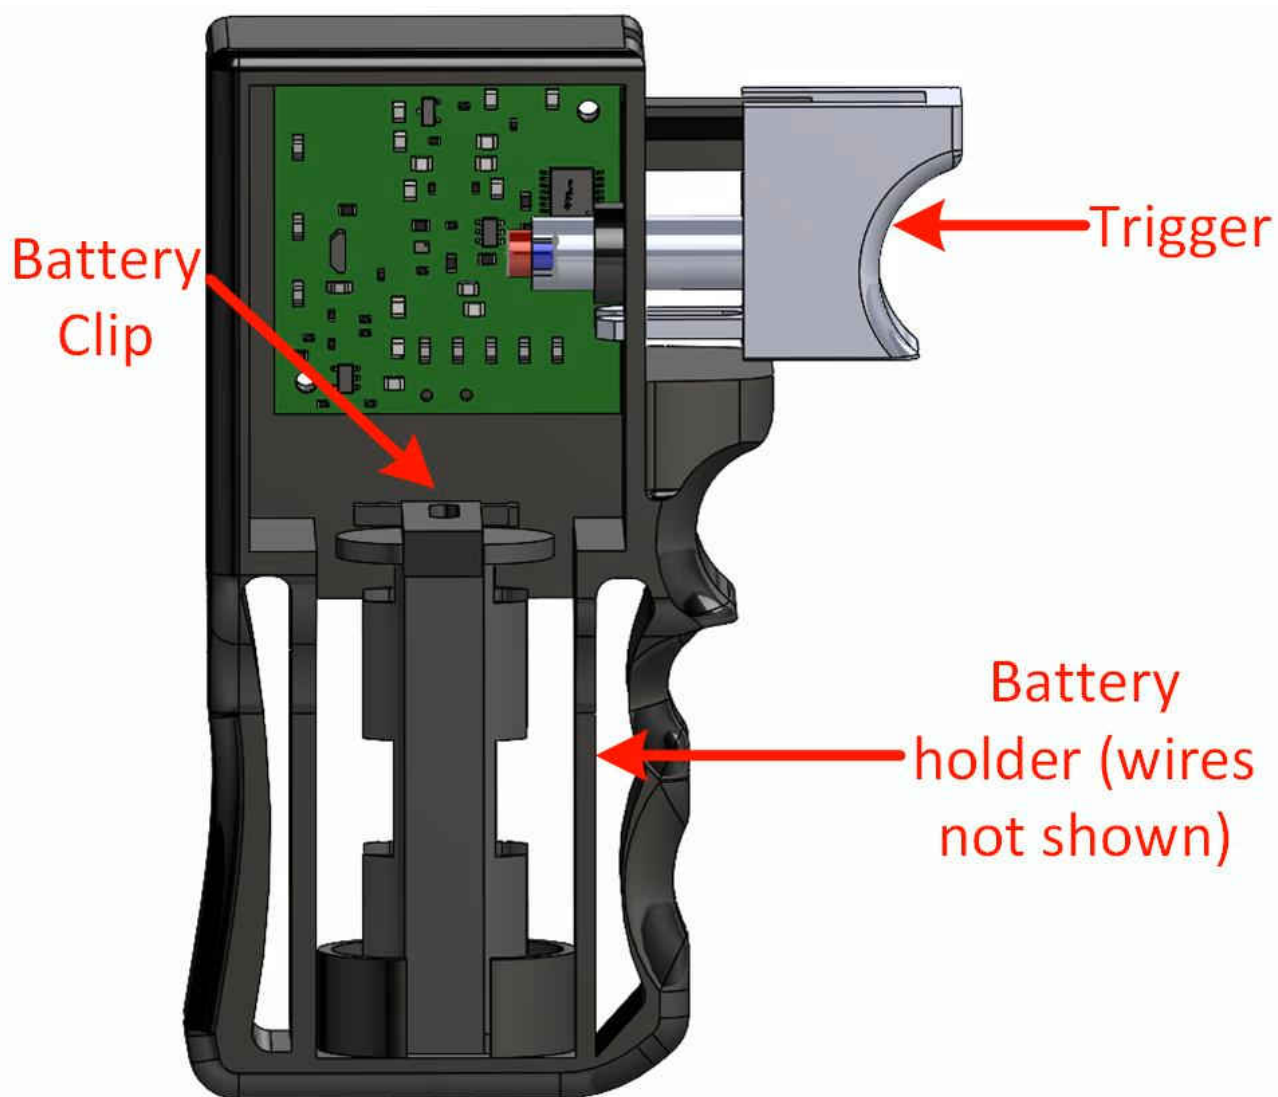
Front View With Battery Holder Inside Trigger Module
